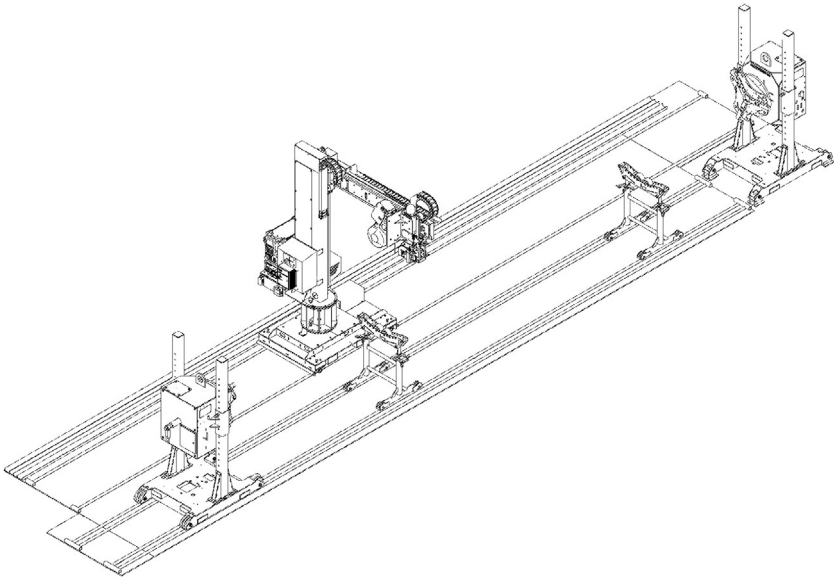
XYZ cartesian-type robot with headstock and tailstock.
